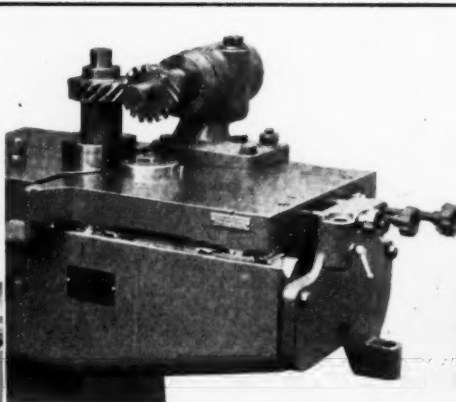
Gear Tester Equipped for Testing Spiral Gears
